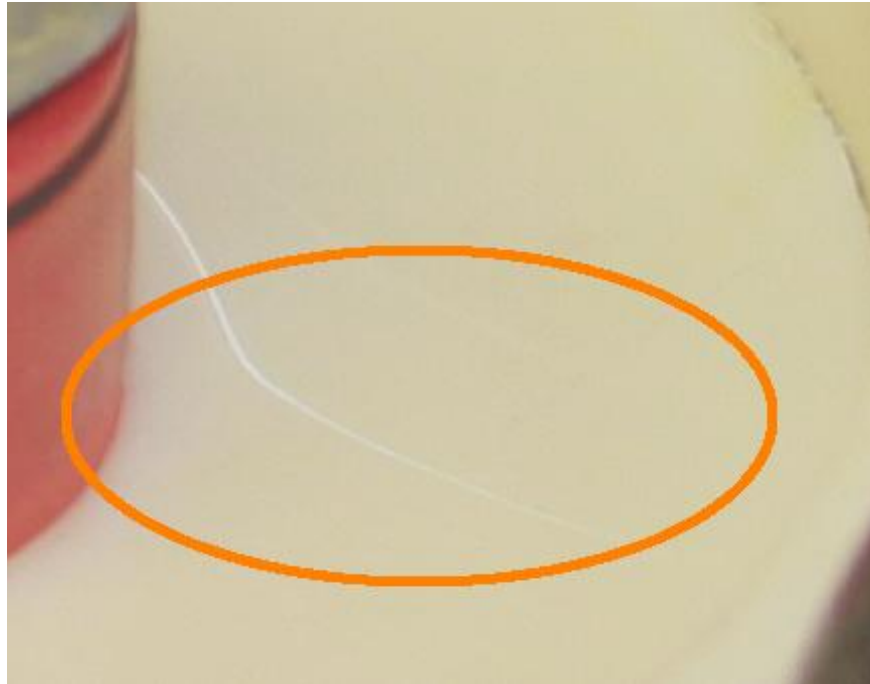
Leaking through the connection flange of the RO module due to rapid prototyping fabrication.
